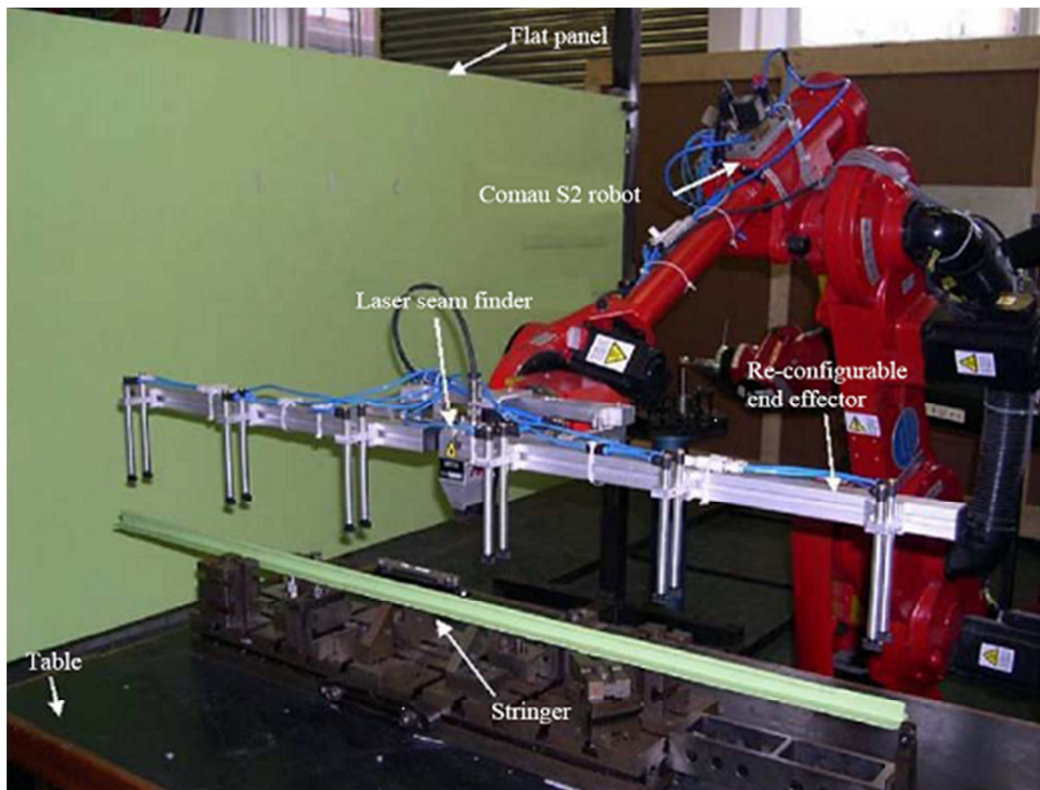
Robot picks up the stringer and aligns it with panel. [36]
